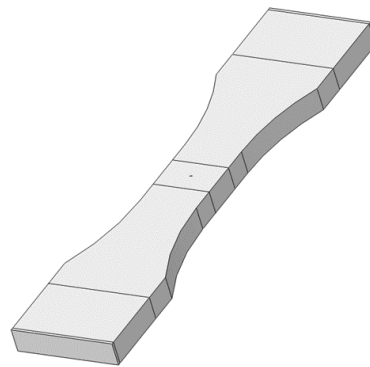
Flat uniaxial fracture mechanics specimen geometry with 40 mm² cross-section testing area
